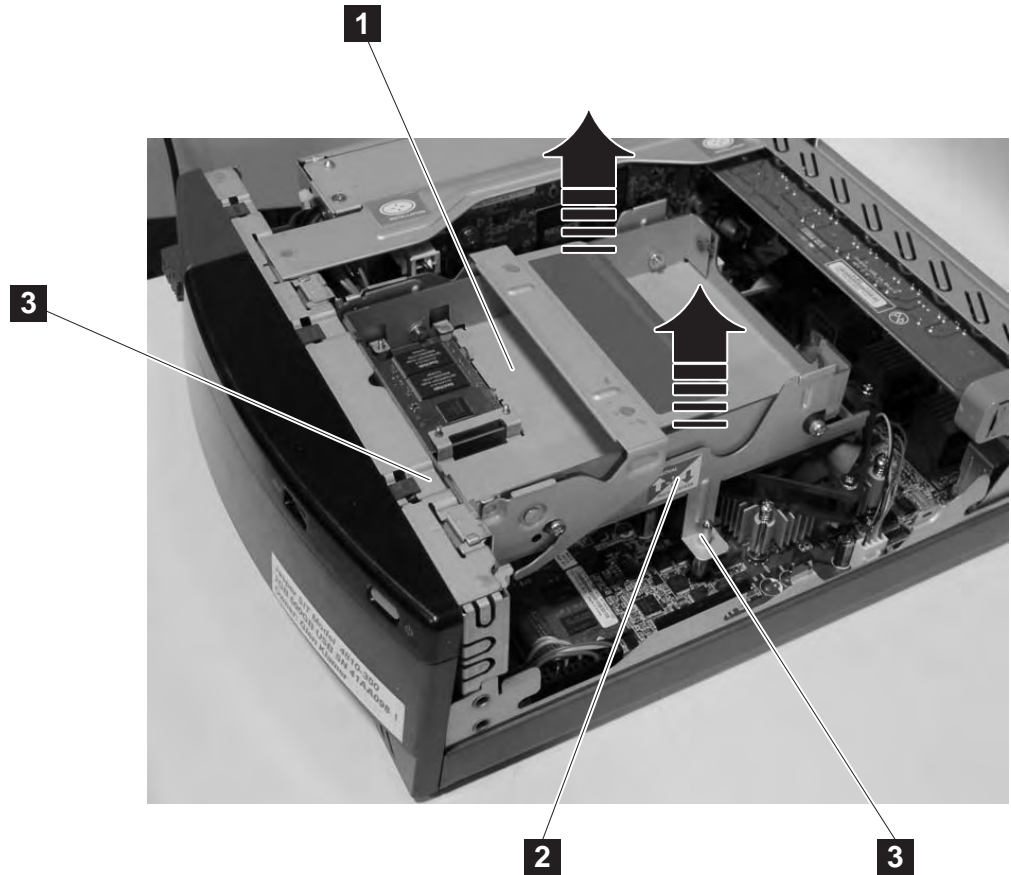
Removing the solid state drive and solid state drive tray as an assembly
